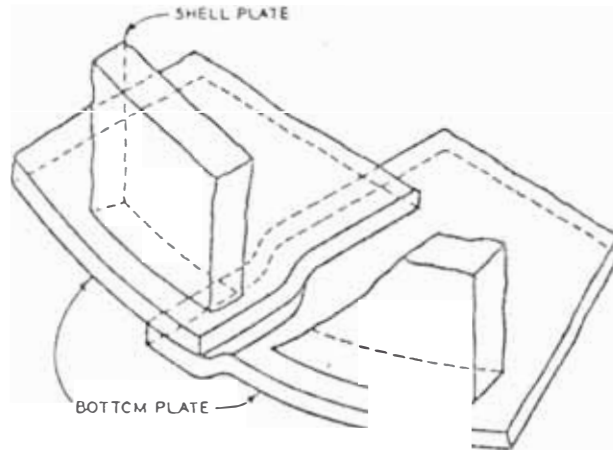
Method for Preparing Lap-Welded Bottom Plates Under Tank Shell [See Par. 3.2.2(a)].
